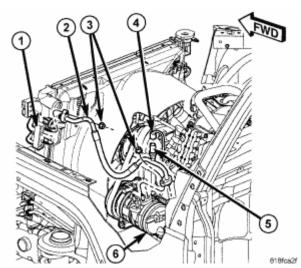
Removing/Installing A/C Discharge Line Courtesy of CHRYSLER LLC
